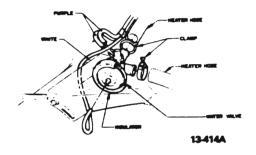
49000 Series Thermostatic Vacuum Valve Installation
